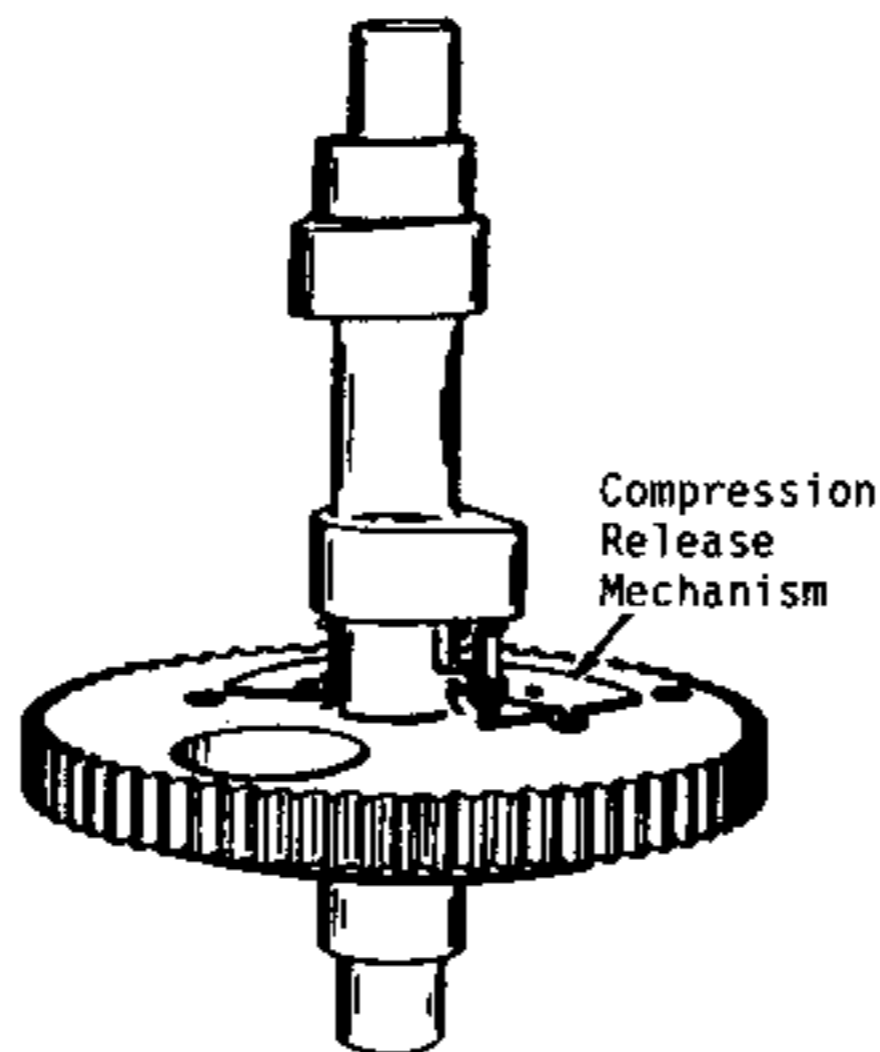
Camshaft is equipped with a compression release mechanism.
